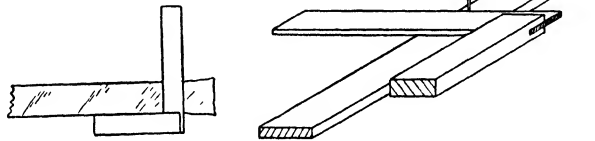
Method of using a small steel square and a scriber for marking out strip metal
